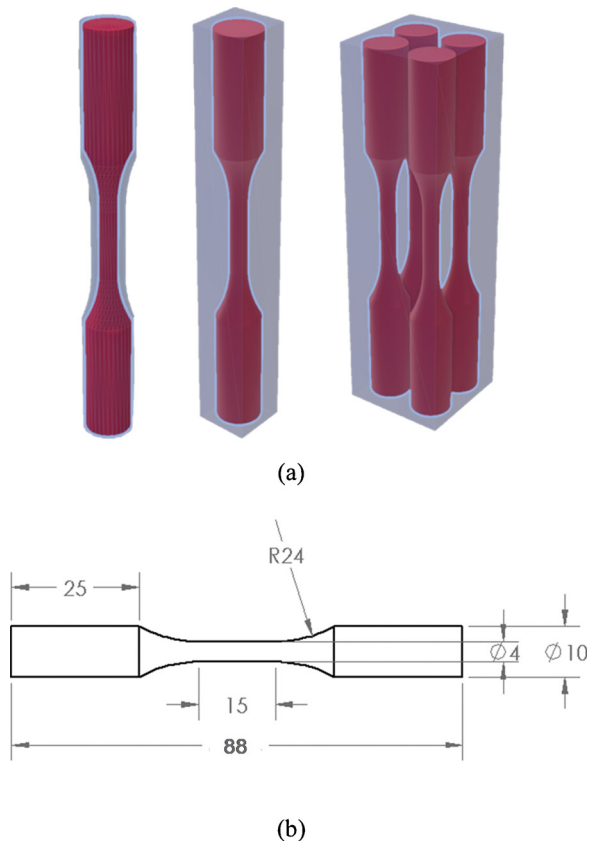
(a) Schematics showing dog-bone parts, small blocks, and large blocks from which specimens were machined to the geometry and dimensions designed based on ASTM Standard E606 [27] and shown in (b). All dimensions are in mm.
